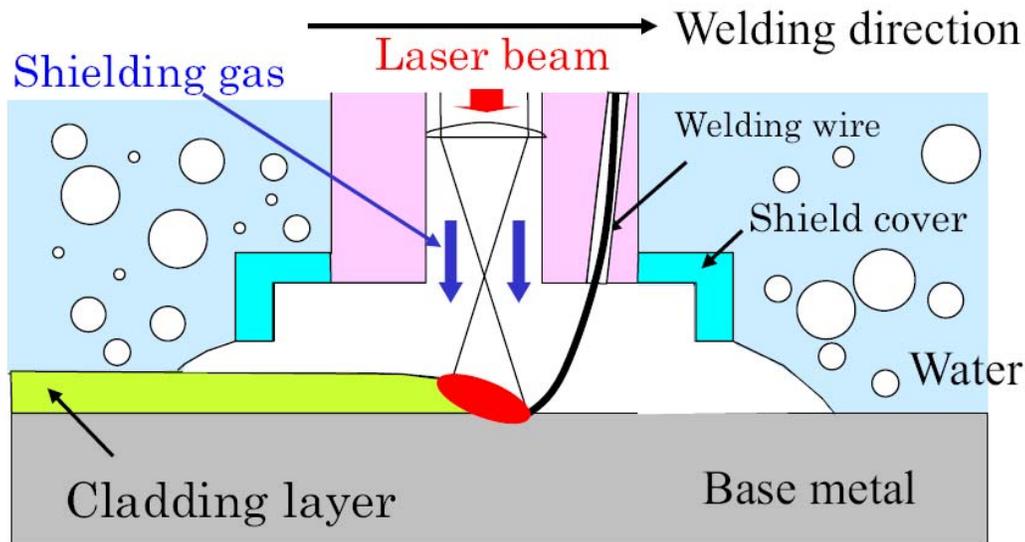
Schematic of Underwater Laser Beam Welding
